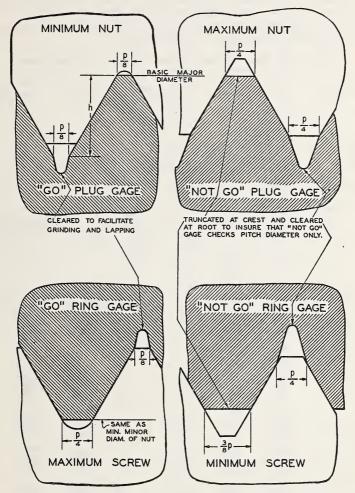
Thread form of "go" and "not go" thread plug and ring gages.
